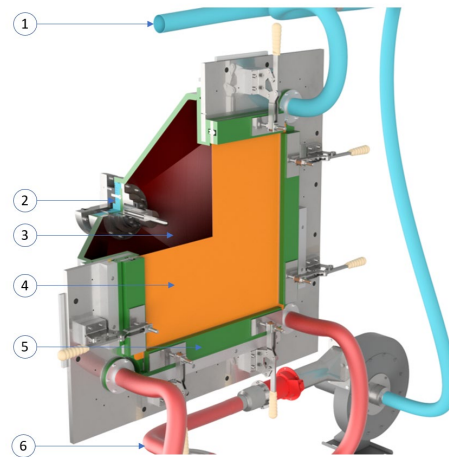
Heating system based on a convection oven with flexible chamber walls with: 1) outlet pipes, 2) cooling coupler, 3) bag, 4) sheet layup, 5) insulating material and 6) inlet pipes
